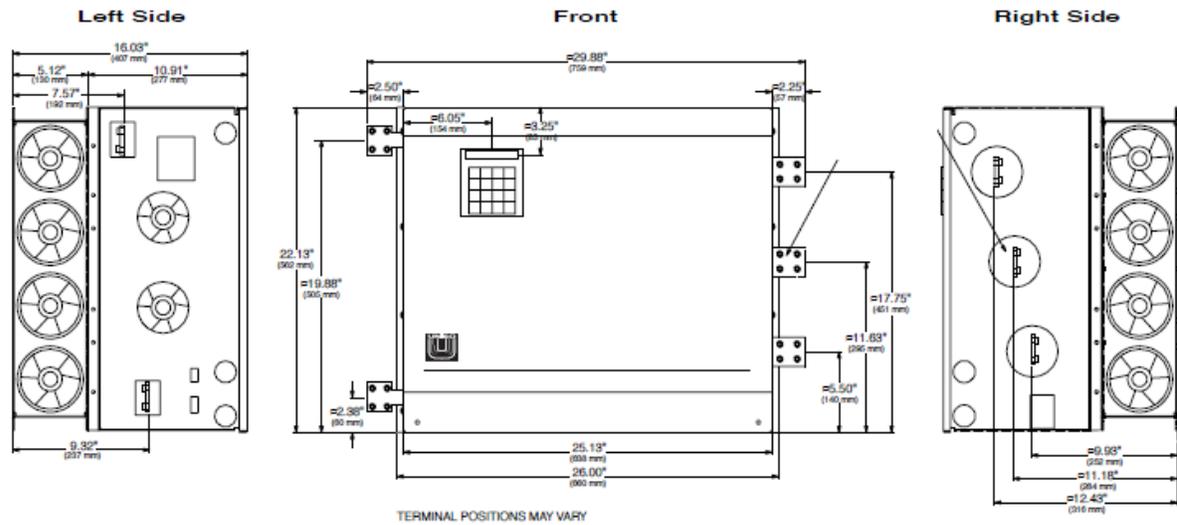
Form 34, 34X, 48, and 48X Mounting Dimensions (1100, 1105, 1200, and 1230 Drives)
